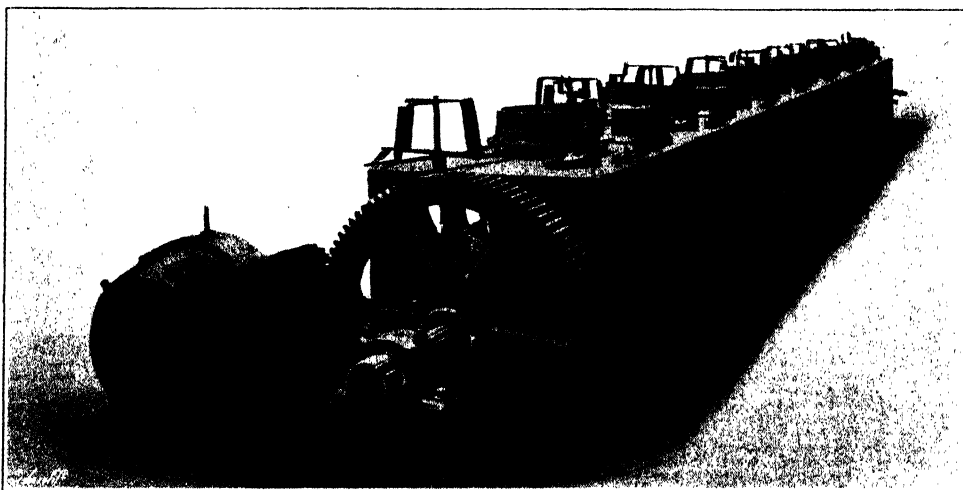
EIGHT-BLOCK WIRE-DRAWING BENCH—WM. GRICE.
